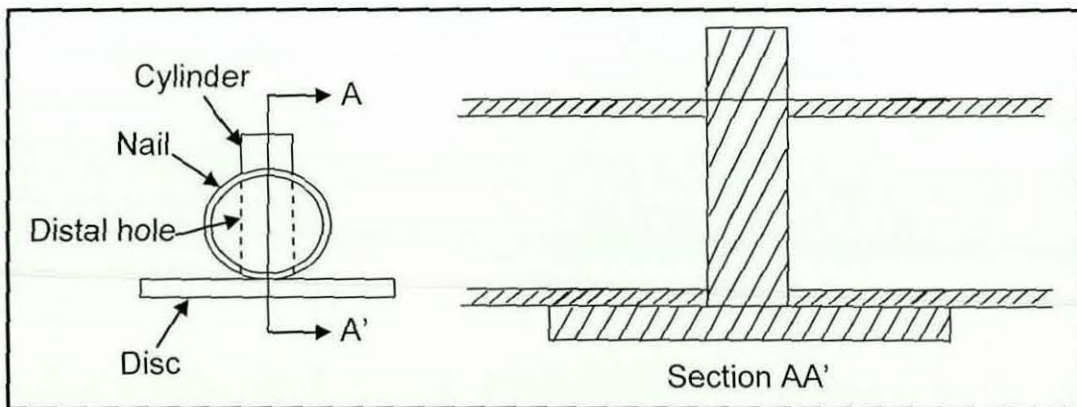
Insertion of solid cylinder into the distal locking hole.
